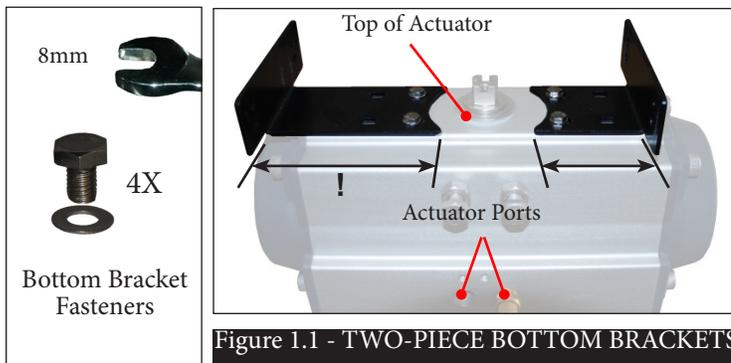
TWO-PIECE BOTTOM BRACKETS
